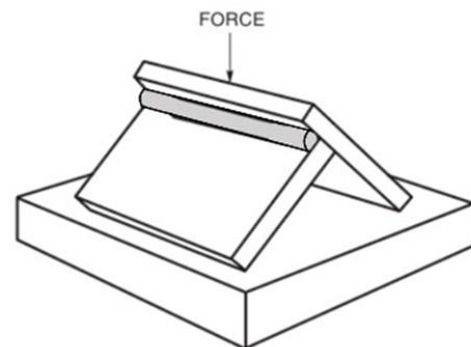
Fillet weld break test configuration for bending experiment (American Welding Society, 2020).
